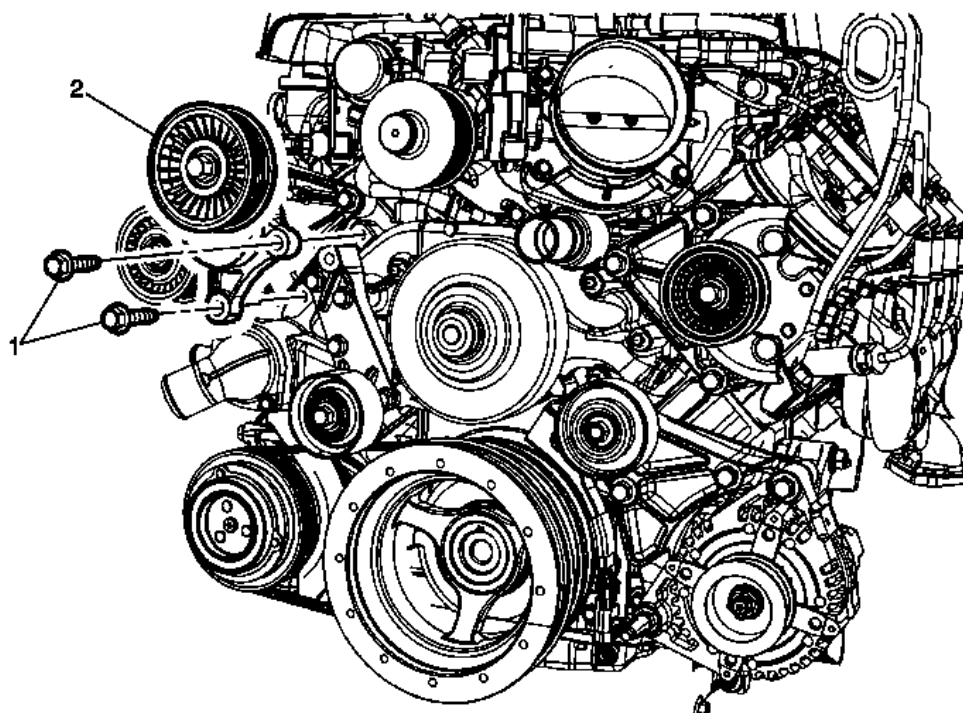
Drive Belt Tensioner & Fasteners - Accessory (LSA)
